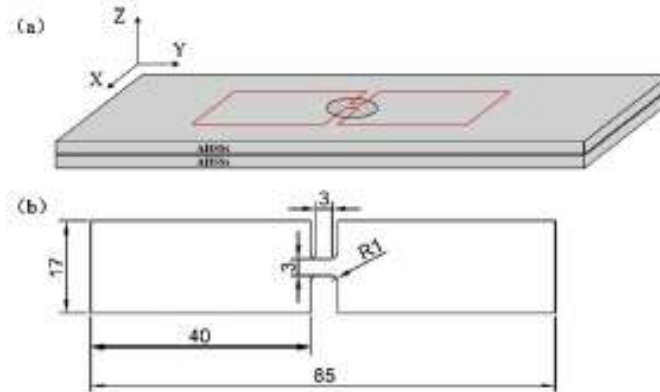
Small tensile specimen preparation: (a) Location of specimen in the spot welds; (b) Geometry of small tensile specimen.
